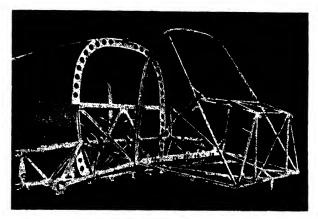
MONOCOQUE REAR FUSELAGE IN ELEKTRON SHEET AND SECTION
